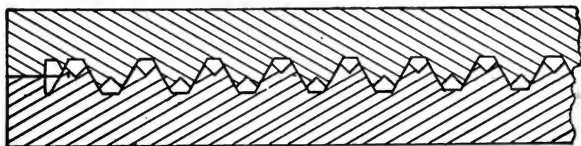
Section Showing Construction of Mold for Casting Lattice Grid.
